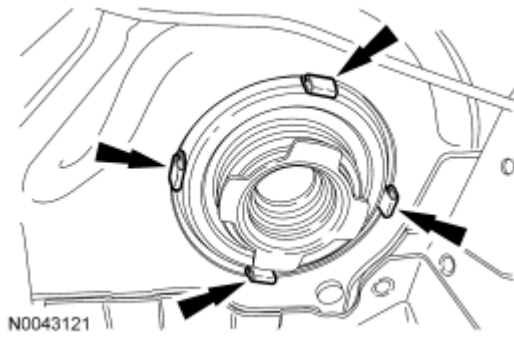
Locating Steering Column Shaft-To-Dash Seal
